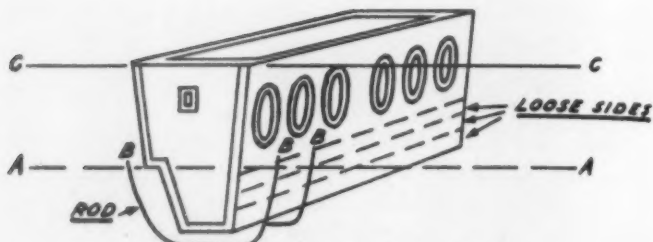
DESIGN OF LARGE ENGINE FRAME.
